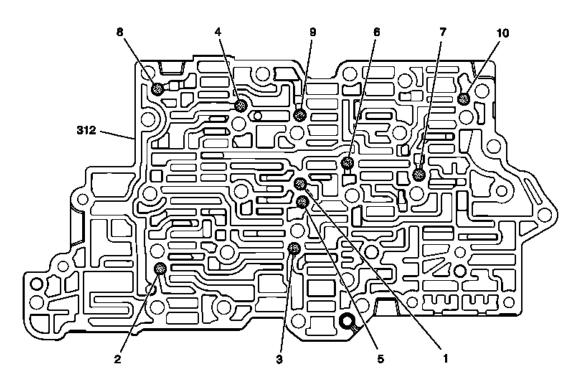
Identifying Seal Locations (2 Of 2) Courtesy of GENERAL MOTORS COMPANY
